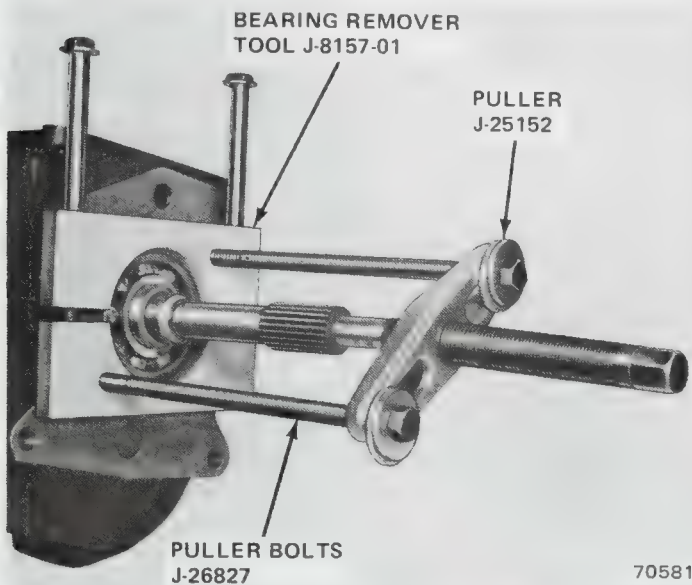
B-51 Clutch Shaft and Front Bearing Removal
